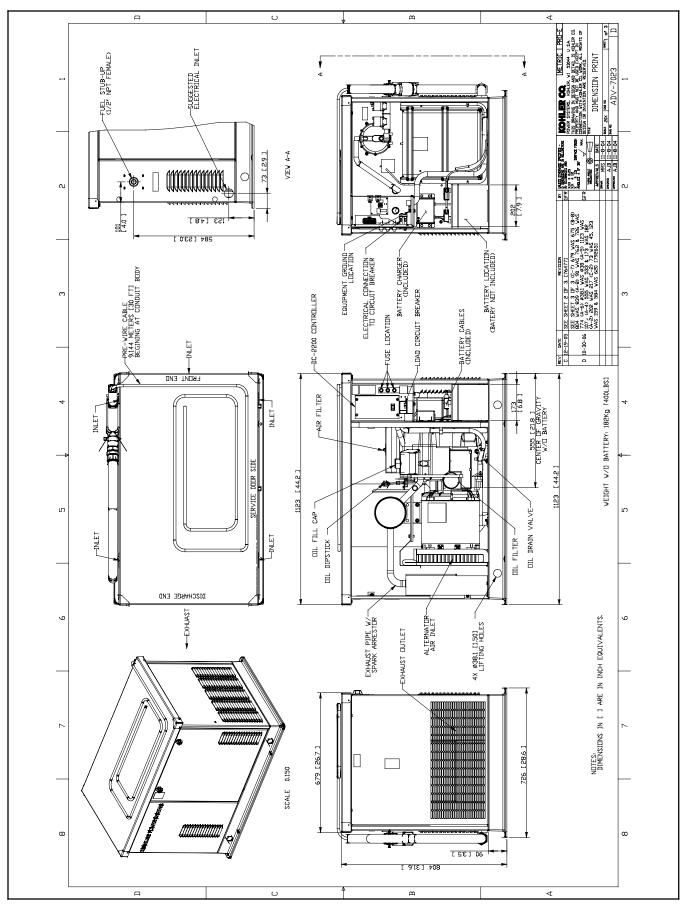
Generator Set Mounting Details and Dimensions, ADV-7023A-D
